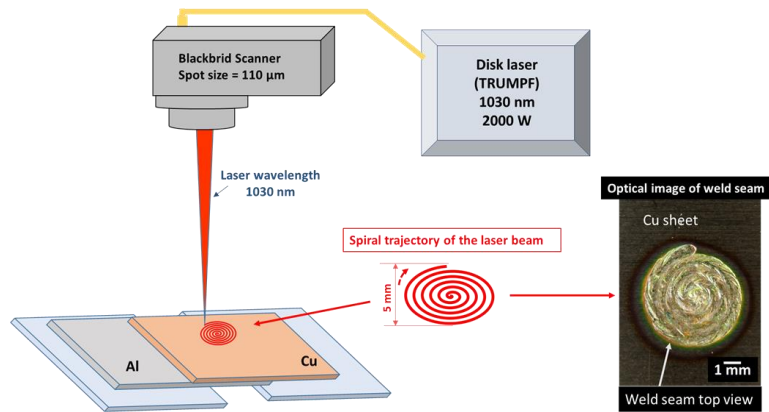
Schematic of the laser welding process and the welding trajectory
